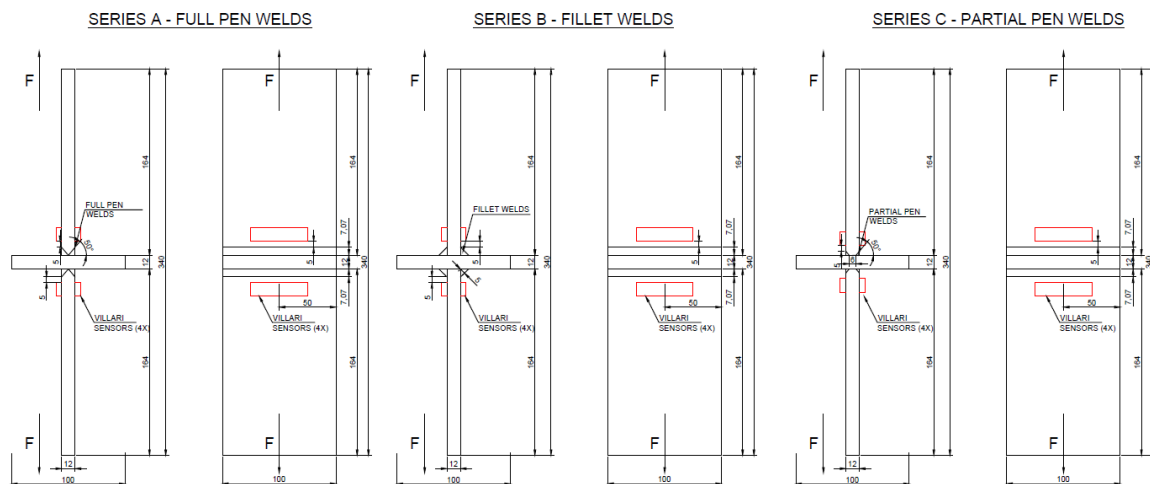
The cruciform joints, RFV2 sensor strips in red.
